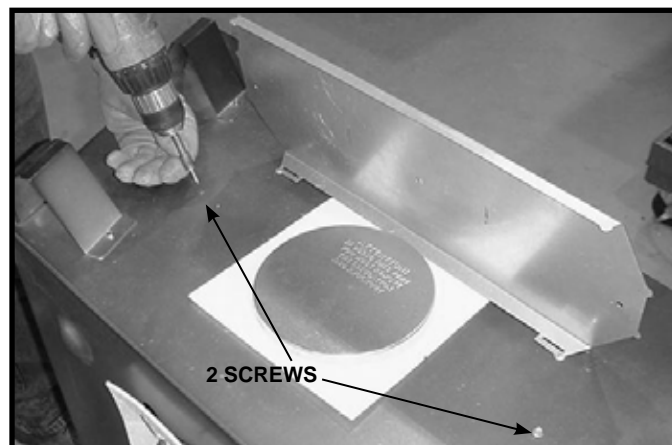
For top vent, remove the two screws holding the top heat shield in place. For rear vent, see Figures 6.12-6.16.
